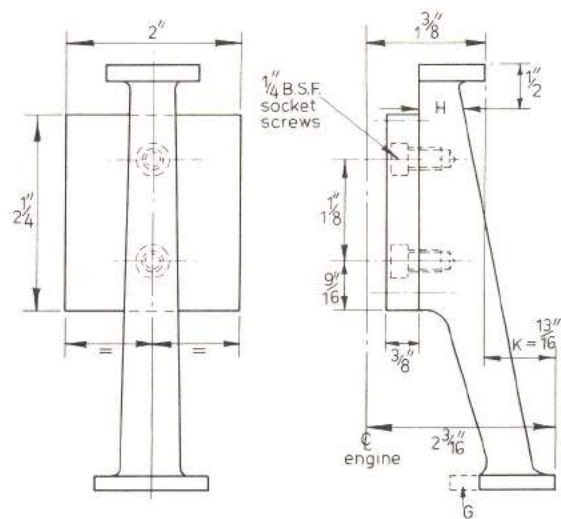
HOLDING FIXTURE FOR STANDARDS
